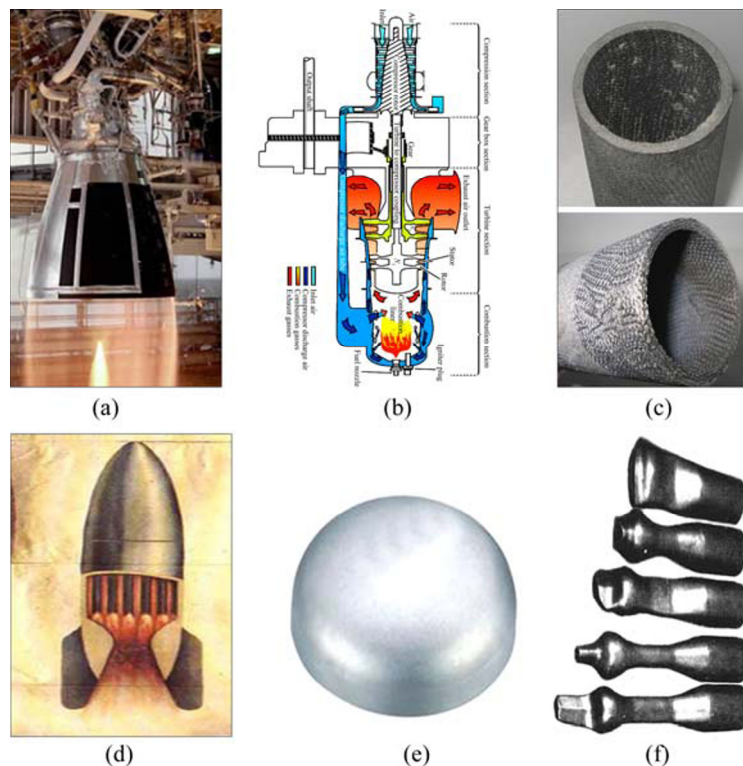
Spun components used in aviation, aerospace, weapon and automobile industries: (a) Supporting cone of jet motors; (b) Turbo-shaft; (c) Tailing spout; (d) Nose cone of rocket engines; (e) End plate of oil pockets; (f) Connecting rod of automobiles [1–5]
